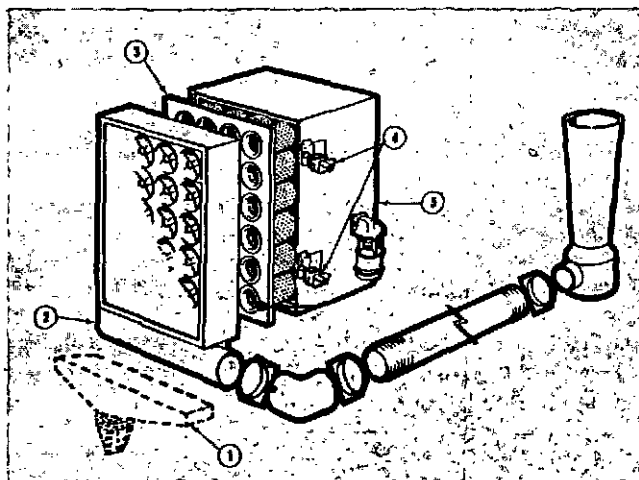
N21026. Air cleaner-cartridge type—two stage with exhaust aspirator or dust bin (dotted lines)
